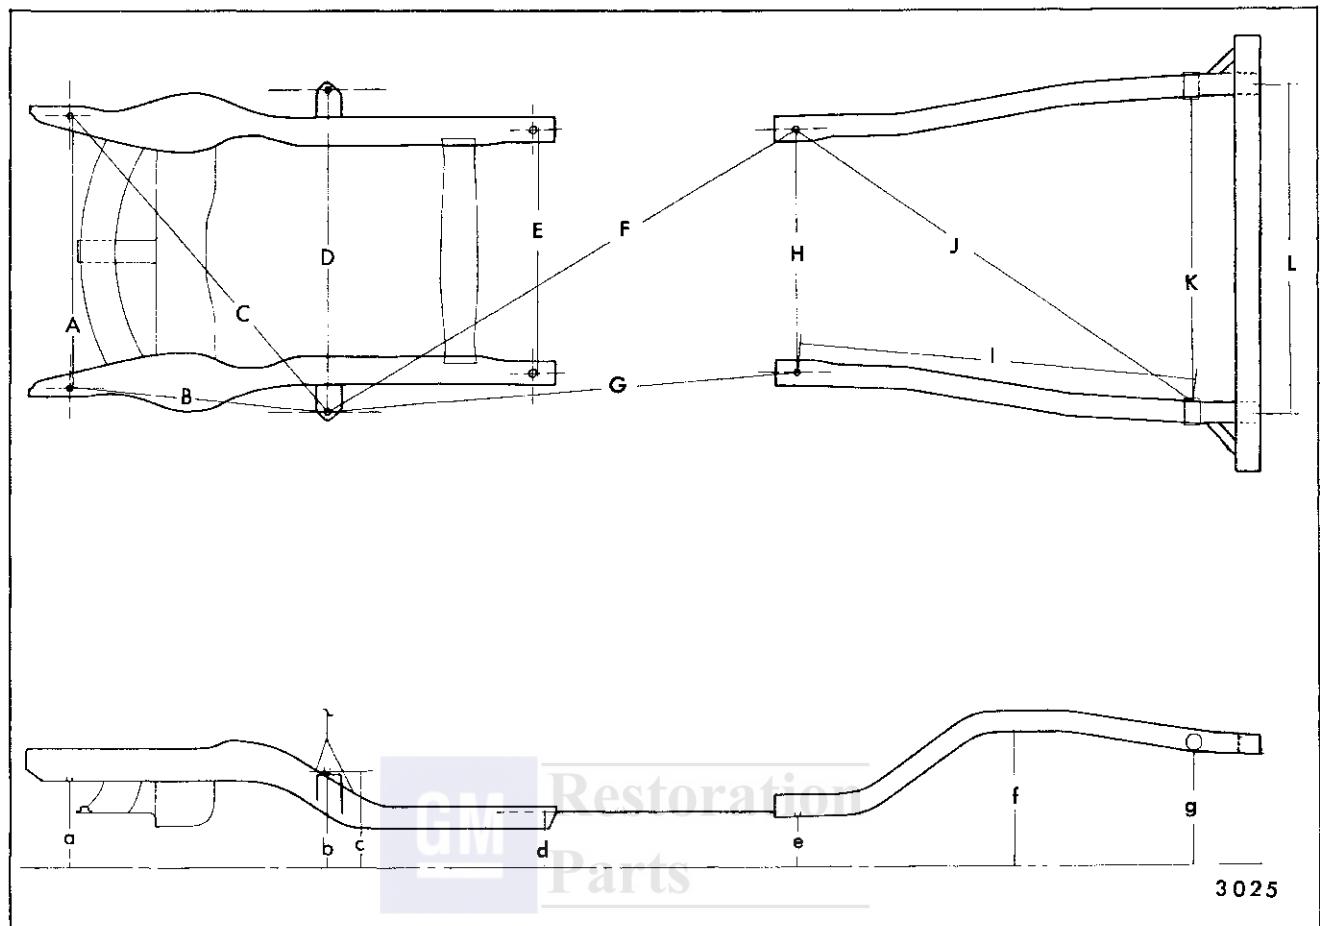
Horizontal & Vertical Checking Dimensions (Chevy II & Acadian "X" Bodies)
